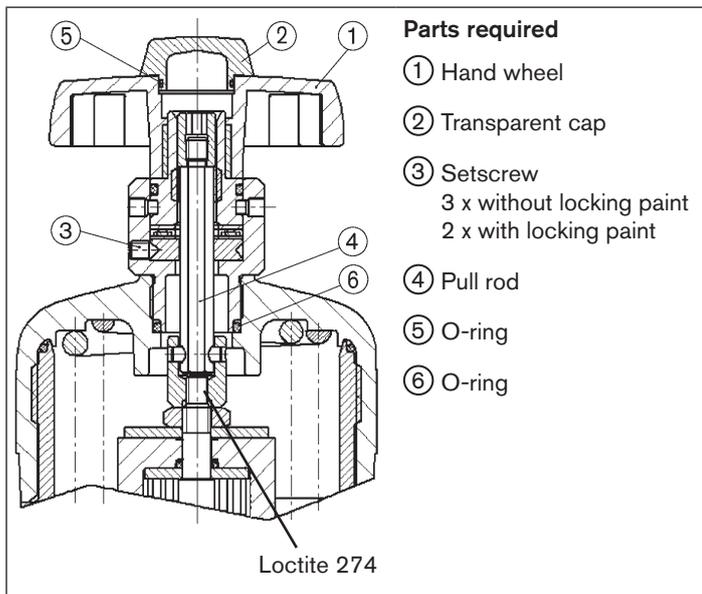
Actuator size 50 to 125 (Ø in mm) with hand wheel
